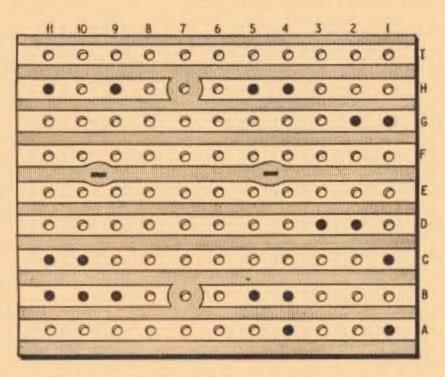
Underside view of the board showing the copper strip breaks and position of the transformer mounting lugs
